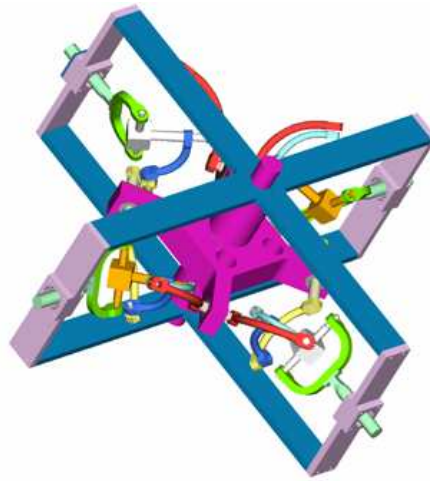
The geometric modelling of a complex mechanism, mounted on a jig, in need of a housing
